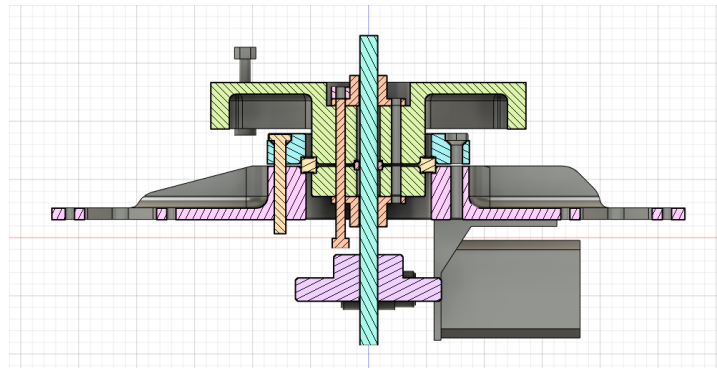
Cross-sectional View of Horizontal Rotation Mechanism with Worm Gear Set
